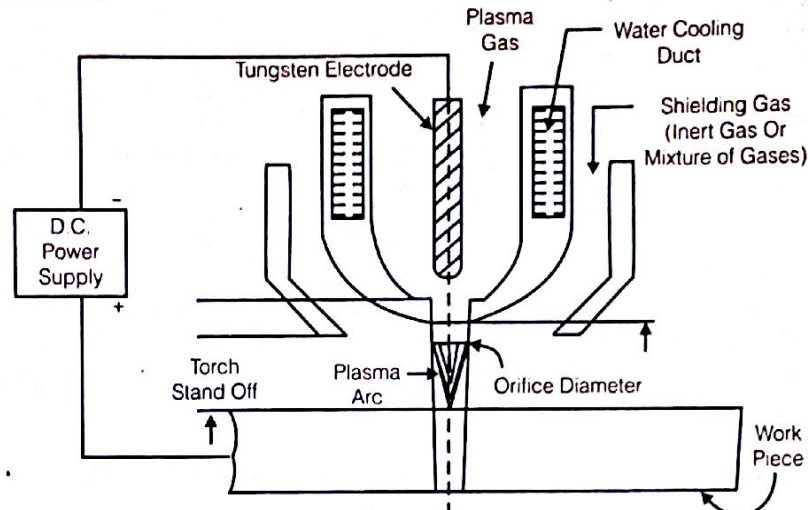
(a) Set up of plasma arc welding
